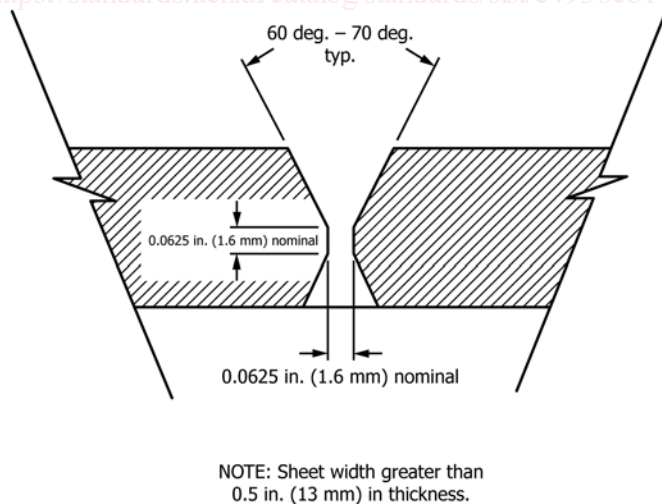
Typical Bevel Profile (Sheet >0.5 in. (13 mm) Thick)
